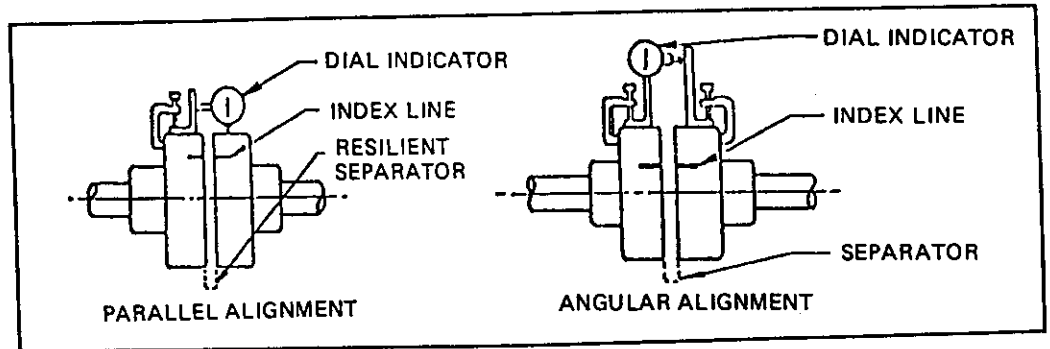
TESTING ALIGNMENT, DIAL INDICATOR
